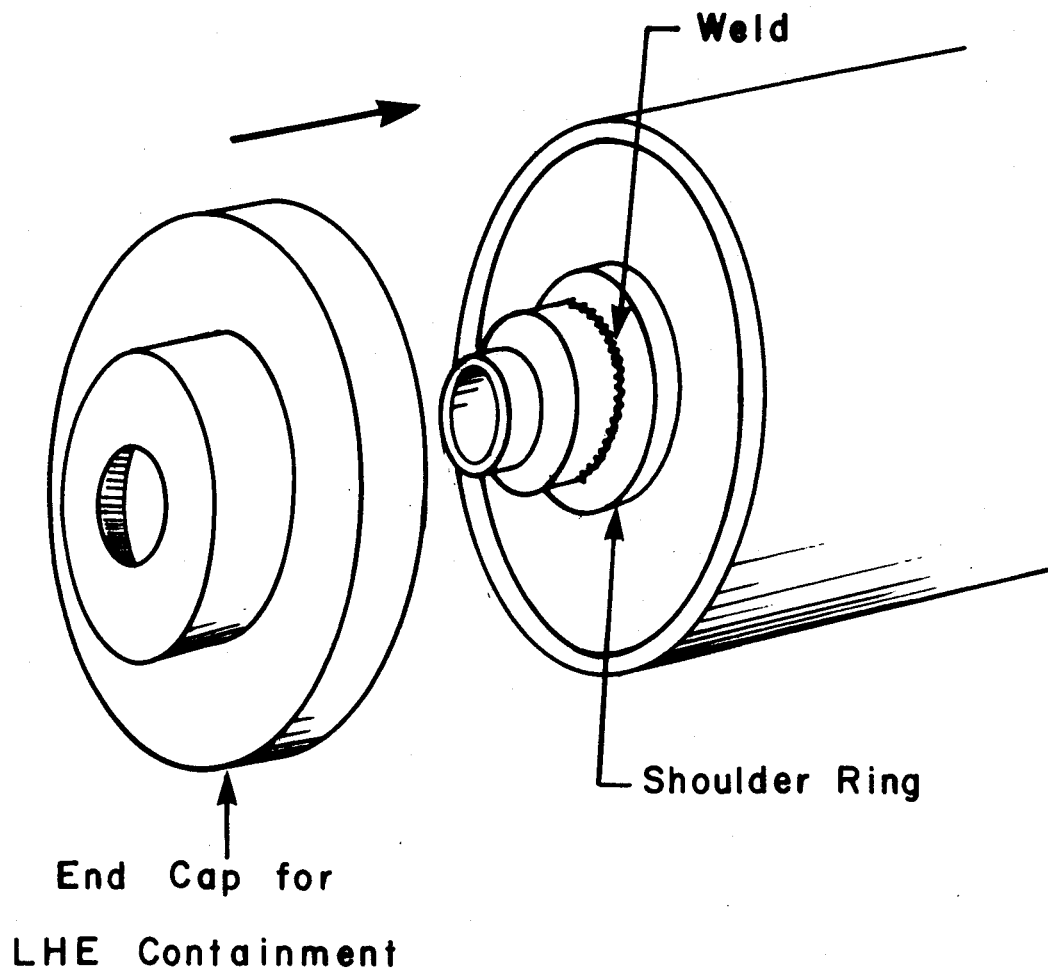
Magnet, Laminations and Outer Shell Assembly Showing Installation of Shoulder Ring and End Cap
